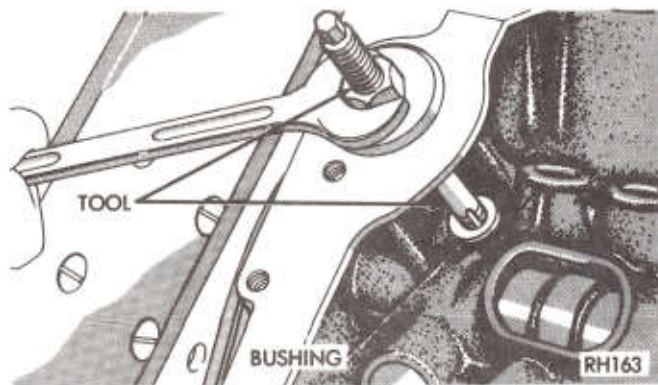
Removing Distributor Drive Shaft Bushing with Tool C-3052
